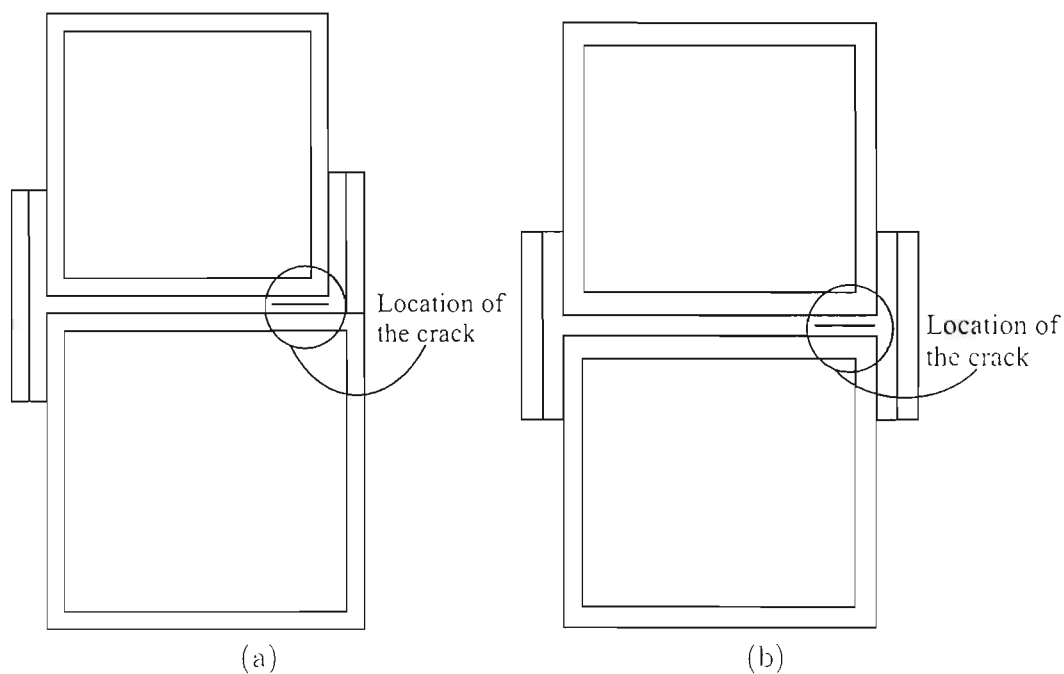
Position of the crack inserted in the adhesive bond of structural joints: (a) steel to aluminium connection, (b) aluminium-to-aluminium connection
